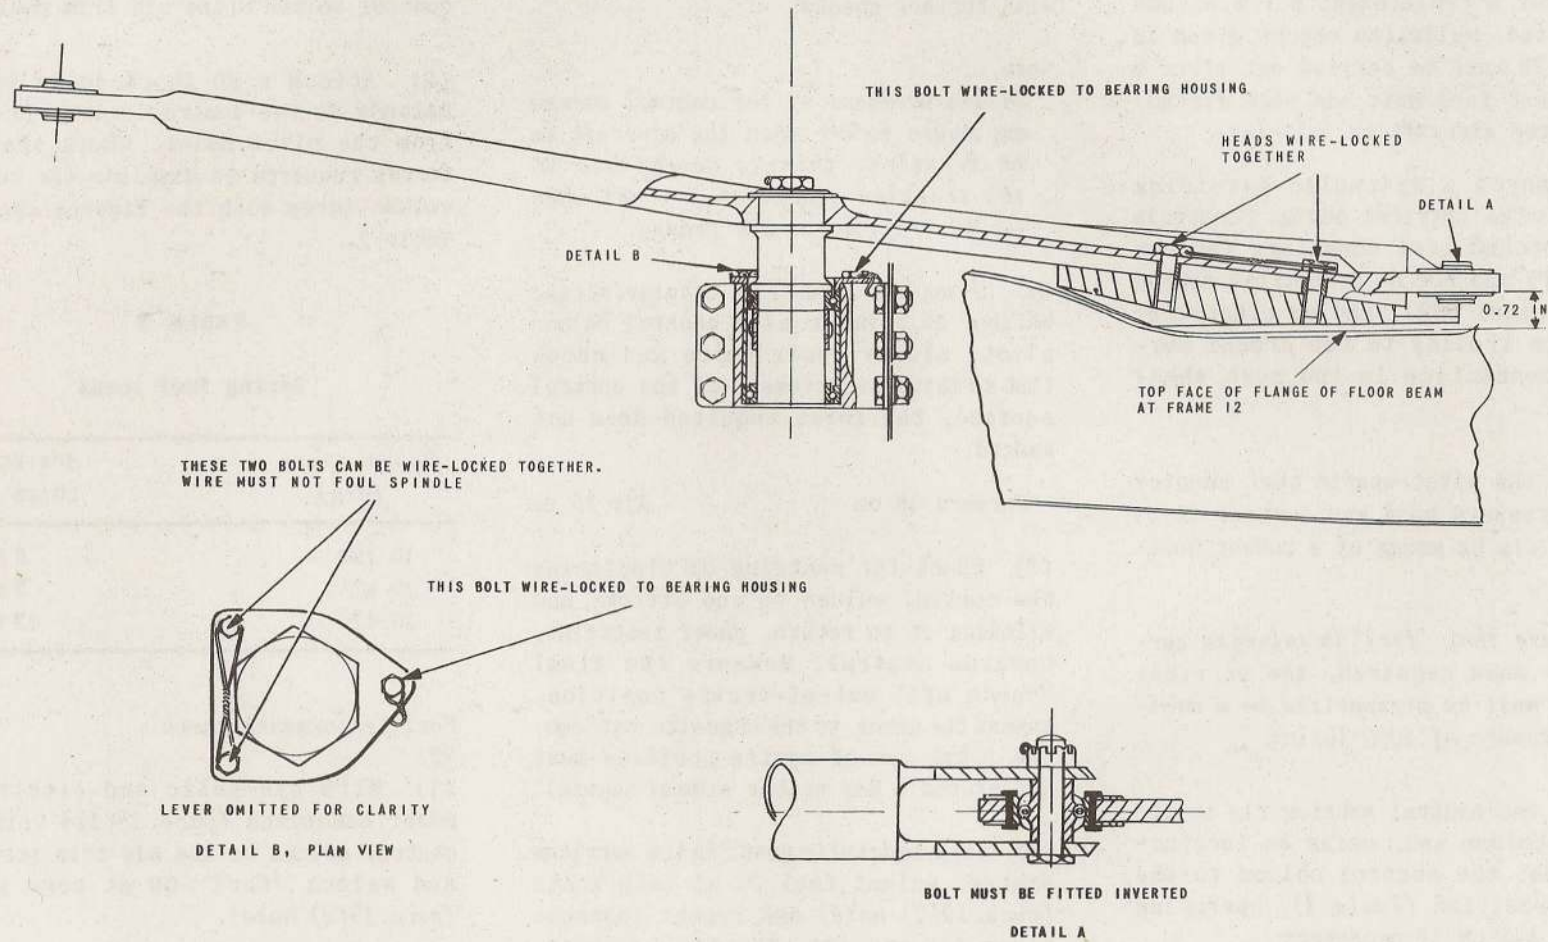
LEVER ASSEMBLY - FRAMES 11-12
